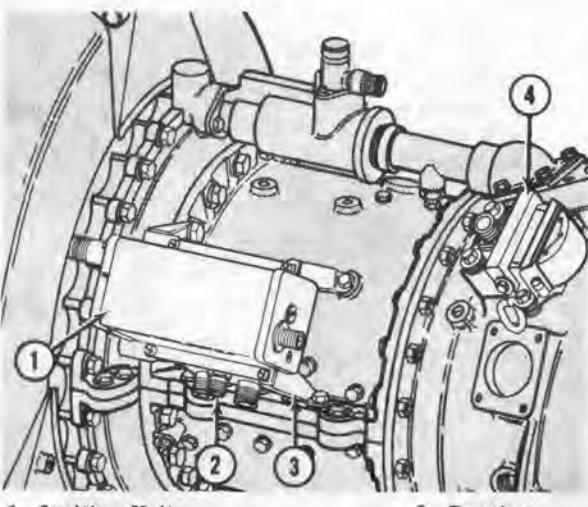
Anti-icing assemblies and ignition unit on T53-L-1A engine
